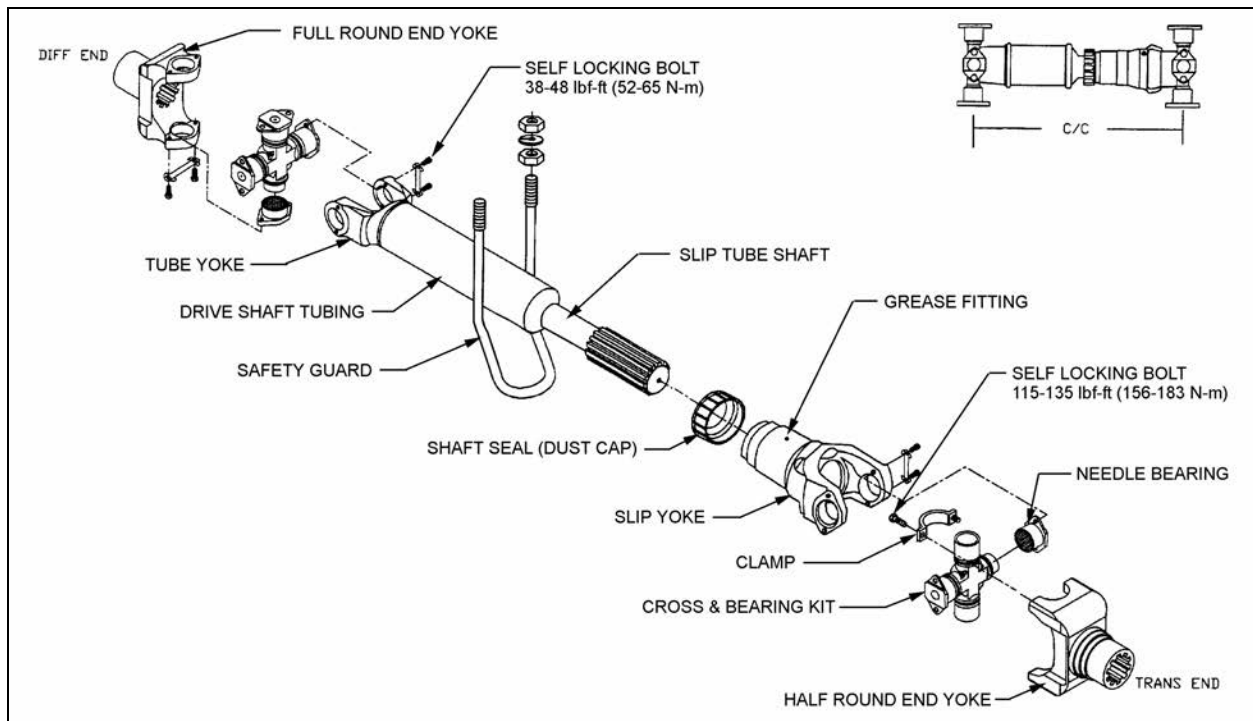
PROPELLER SHAFT ASSEMBLY
